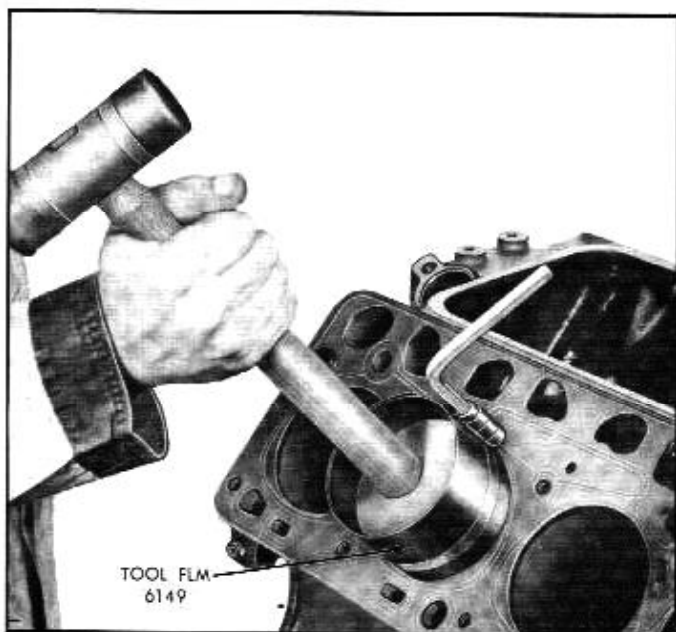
A-111—Installing Piston Assembly in Cylinder Block—Typical
